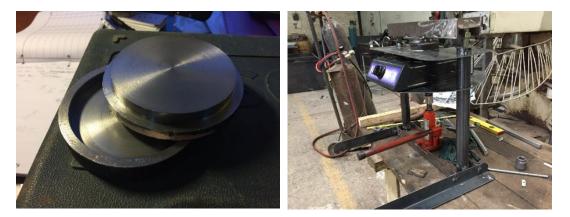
, 94 Iron plates for producing puff crackers, manufactured by Numerical Engineering (left), and prototyping of puff-cracker machine (right) from DK Engineering. A gas cooker with a hole at the center and a second-hand hydraulic jack for automobiles are used.
